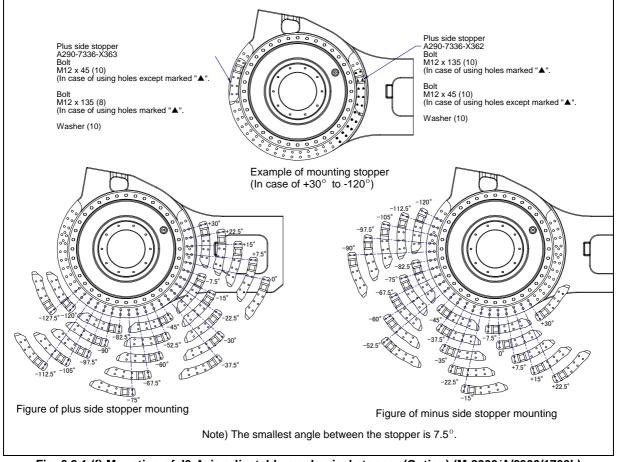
(f) Mounting of J3-Axis adjustable mechanical stopper (Option) (M-2000iA/2300/1700L)
